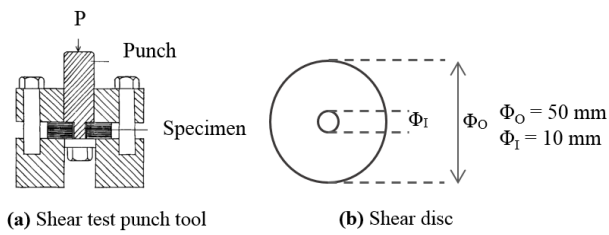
ASTM D732 Punch shear test: (a) punch assembly and (b) Shear punch disc.
